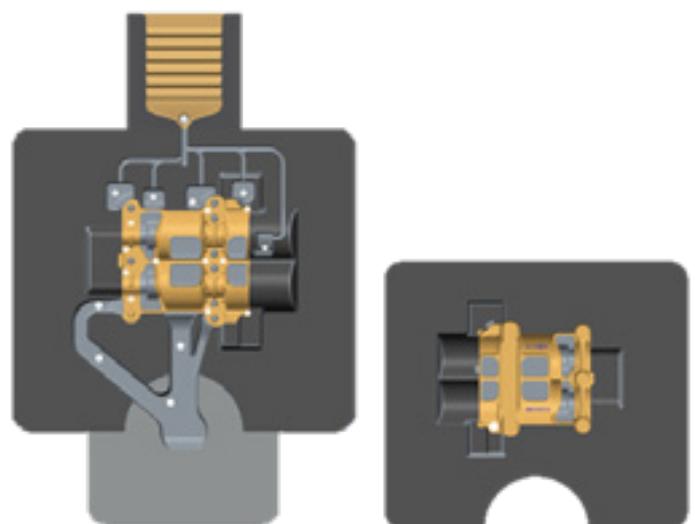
Models of the die used to produce the balance shaft housing. All die faces contacted by the liquid aluminum were coated [2,3]
